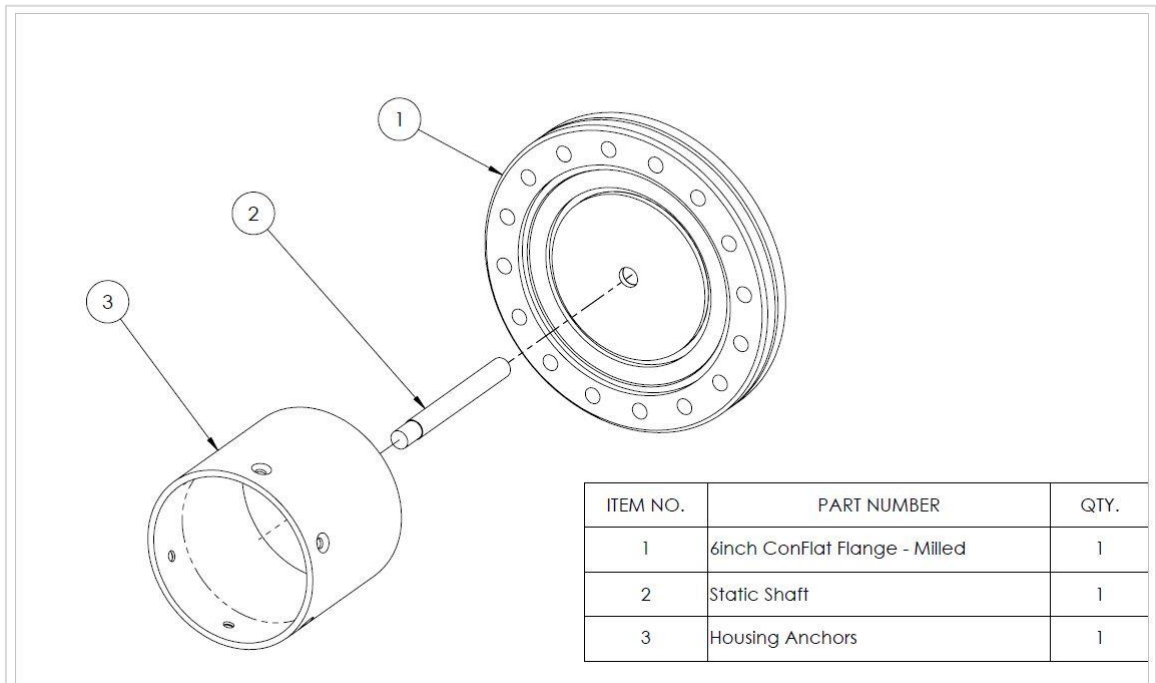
Welding Sub-Assembly with the pump housing anchor and static shaft
